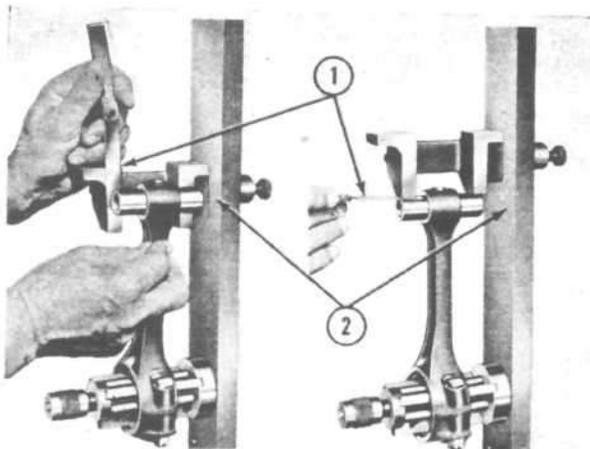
CHECKING CONNECTING ROD ALIGNMENT
